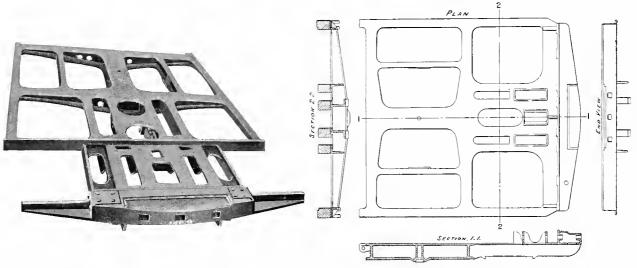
Cast Steel Combined Platform and Double Body Bolster for Wood Passenger Cars. . Commonwealth Steel Co.
